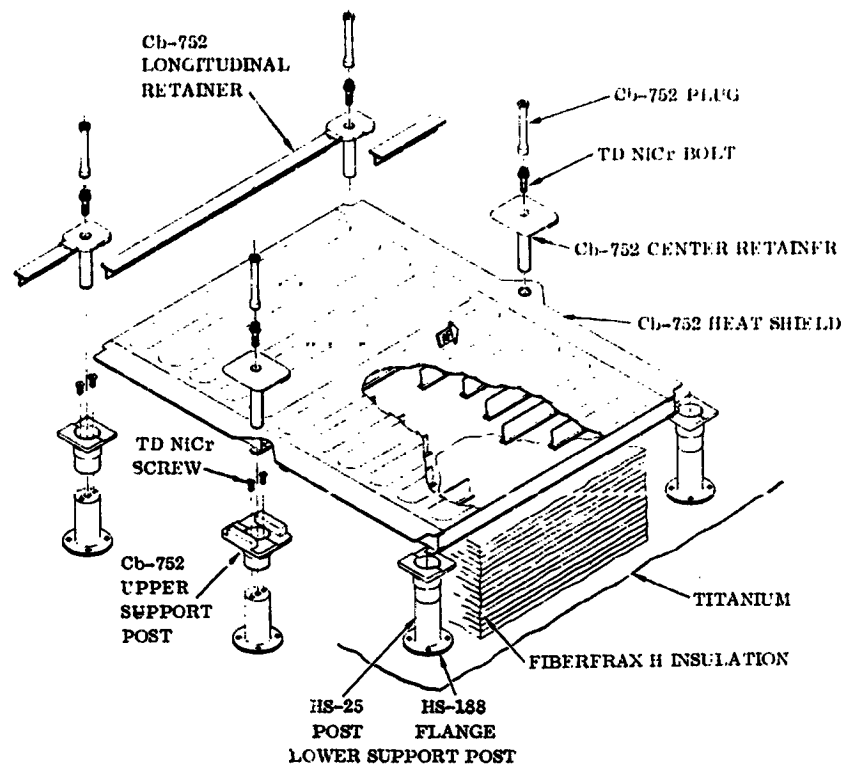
Tee-Stiffened TPS Exploded Assembly
